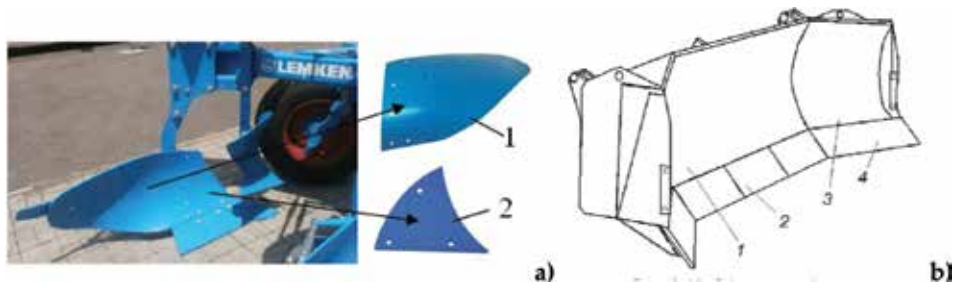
Sectional construction of plow (a) and bulldozer (b) mold board: “1—wing” and “2—breast” of plow’s body; “3—frontal” and “4—side” sections of spherical mold board of bulldozer.
